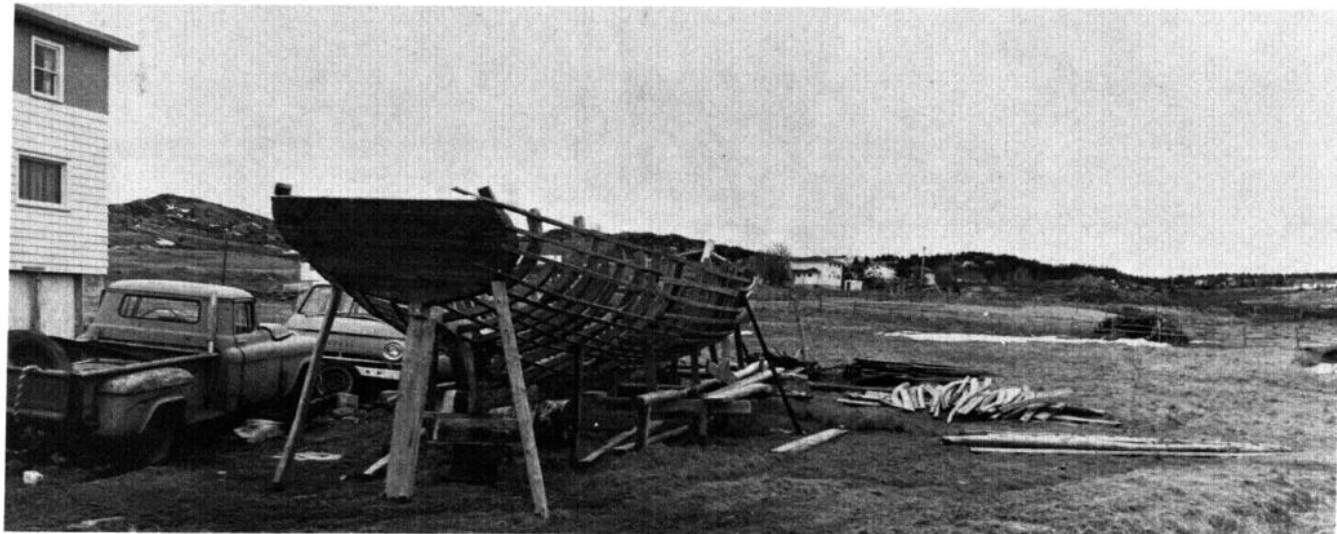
A small schooner beinn built in 1877 at Brigus, Newfoundland. Similar stocks and shores could have been used in medieval Europe, leaving little remains to be found by excavation (Photograph: Basil Greenhill)
